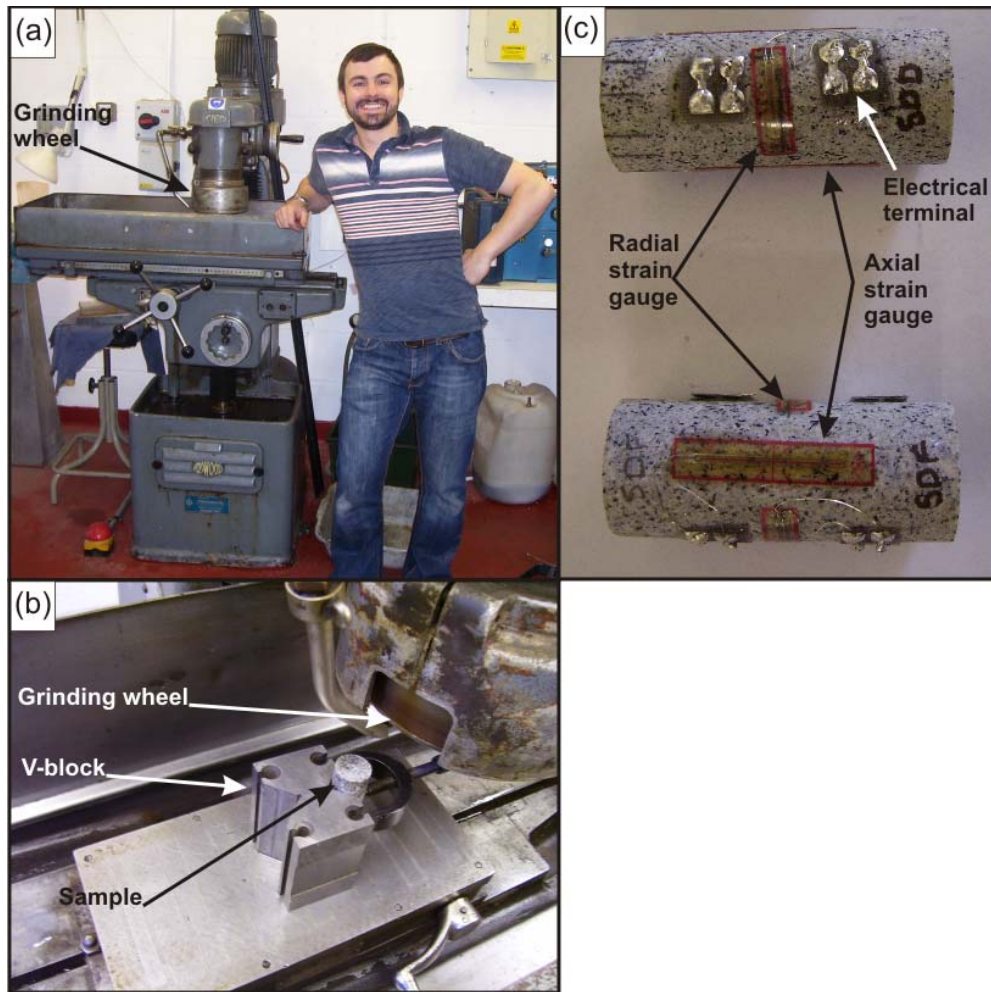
Squaring and surface finishing of cores. a) Grinding machine. b) Cored sample fixed in V-block. c) Radial and axial strain gauge glued to core.
